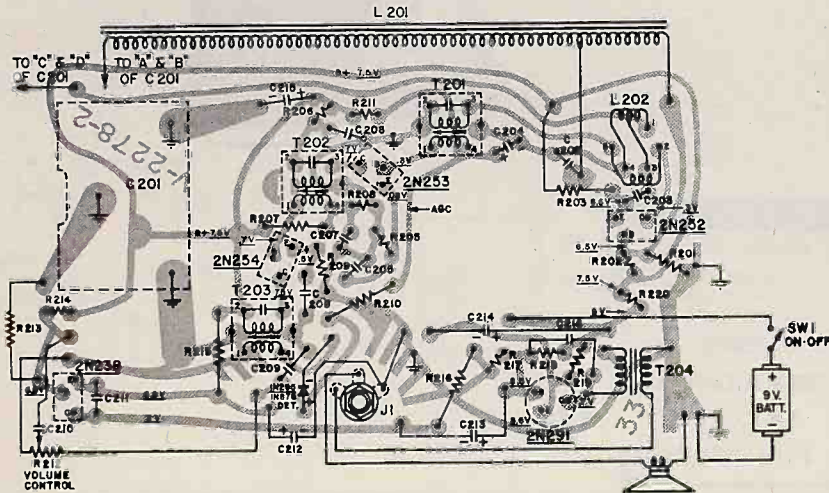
Bottom View of Printed Board Showing Top Components Symbolically
